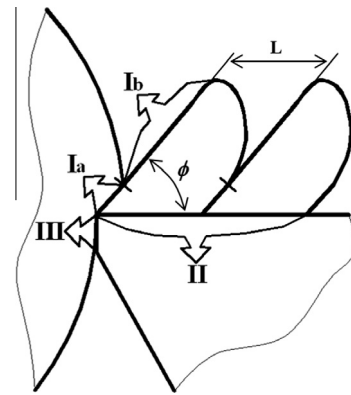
Sketch of cutting zone during hard cutting, L – segment length, ϕ – shear angle, (Ia) micro cracked and plastically deformed shear zone, (Ib) cracked region, (II) tool – chip contact, (III) tool – workpiece contact.
